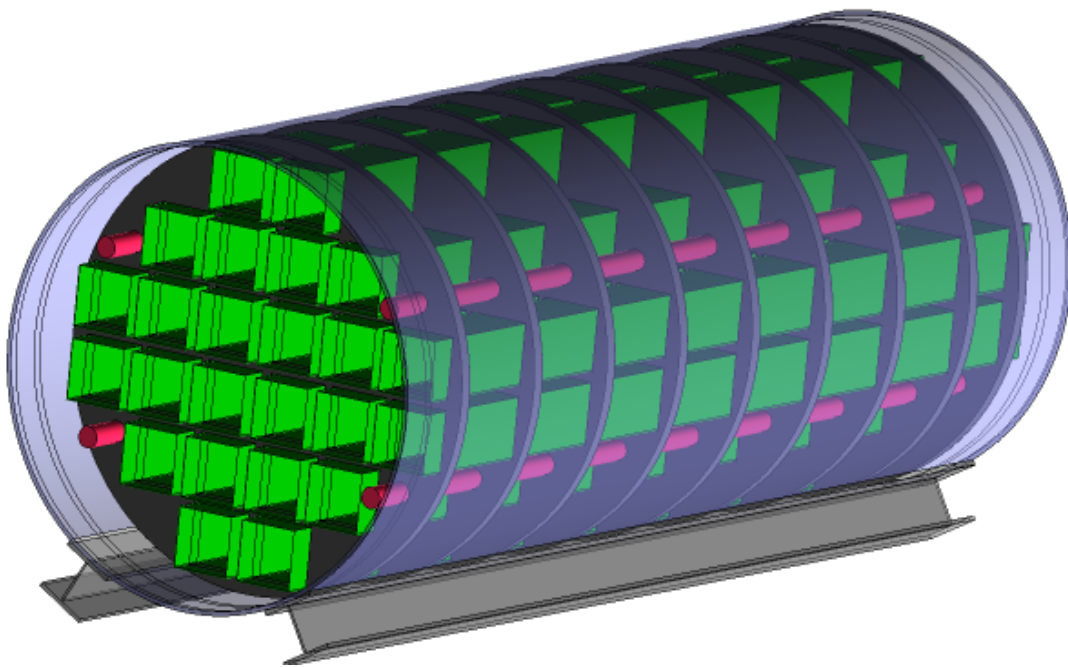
Three-dimensional view of the DSC internal showing the support rod, guide sleeve, spacer disk, and guide rails
